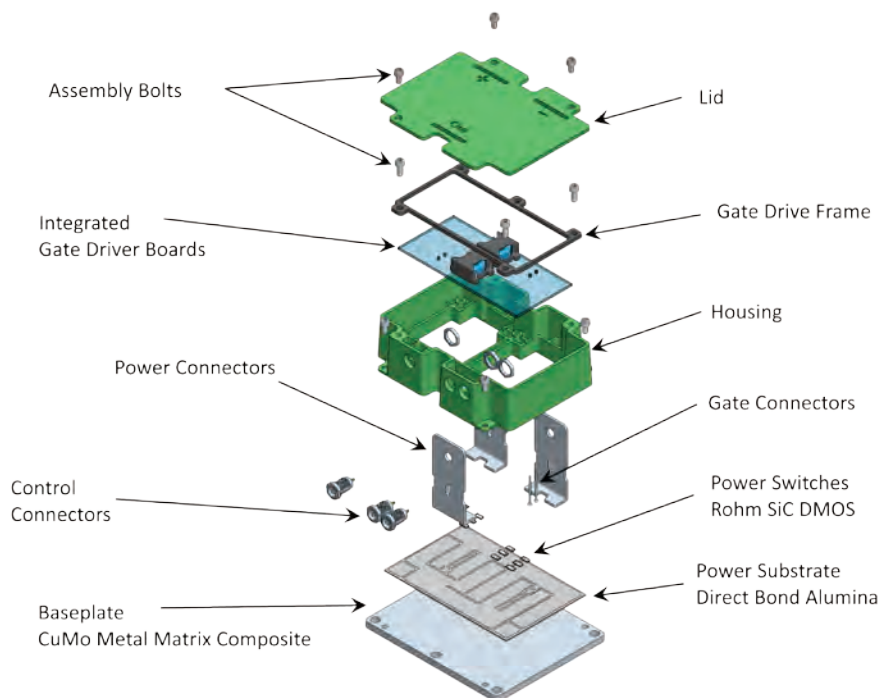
Exploded view of the high-temperature SiC half-bridge power module.
